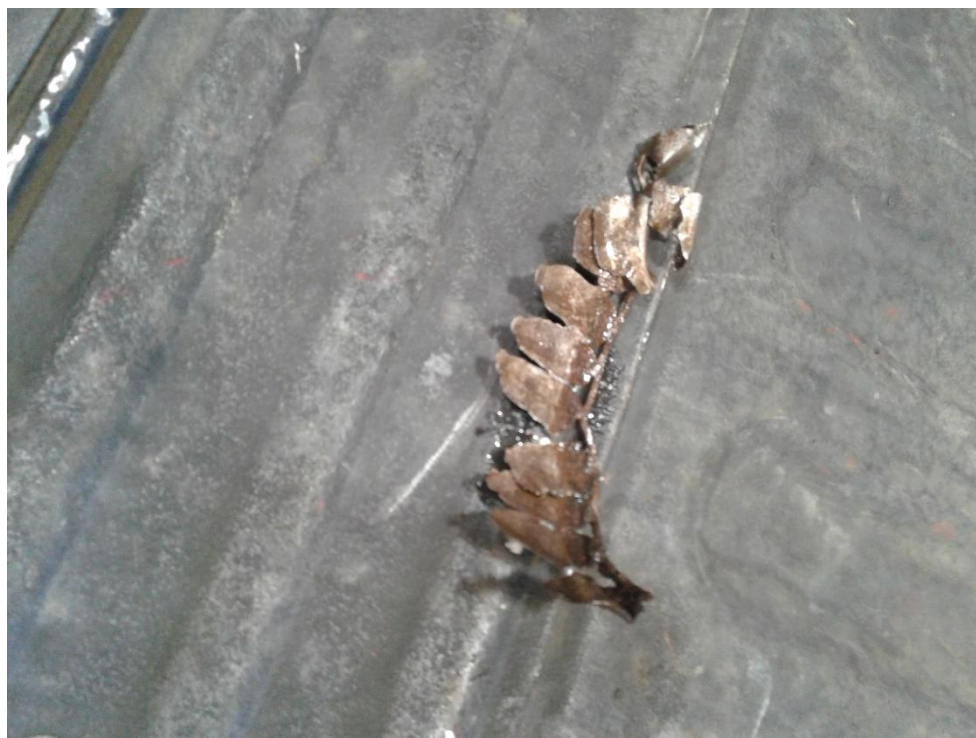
Images from the Bay Valves service center showing the HRSG 1 CRH stop valve damaged gearbox bearing components.
